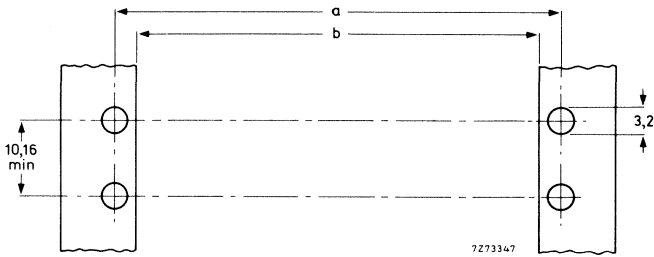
Rail mounting; see Table 2 for dimensions a and b.
